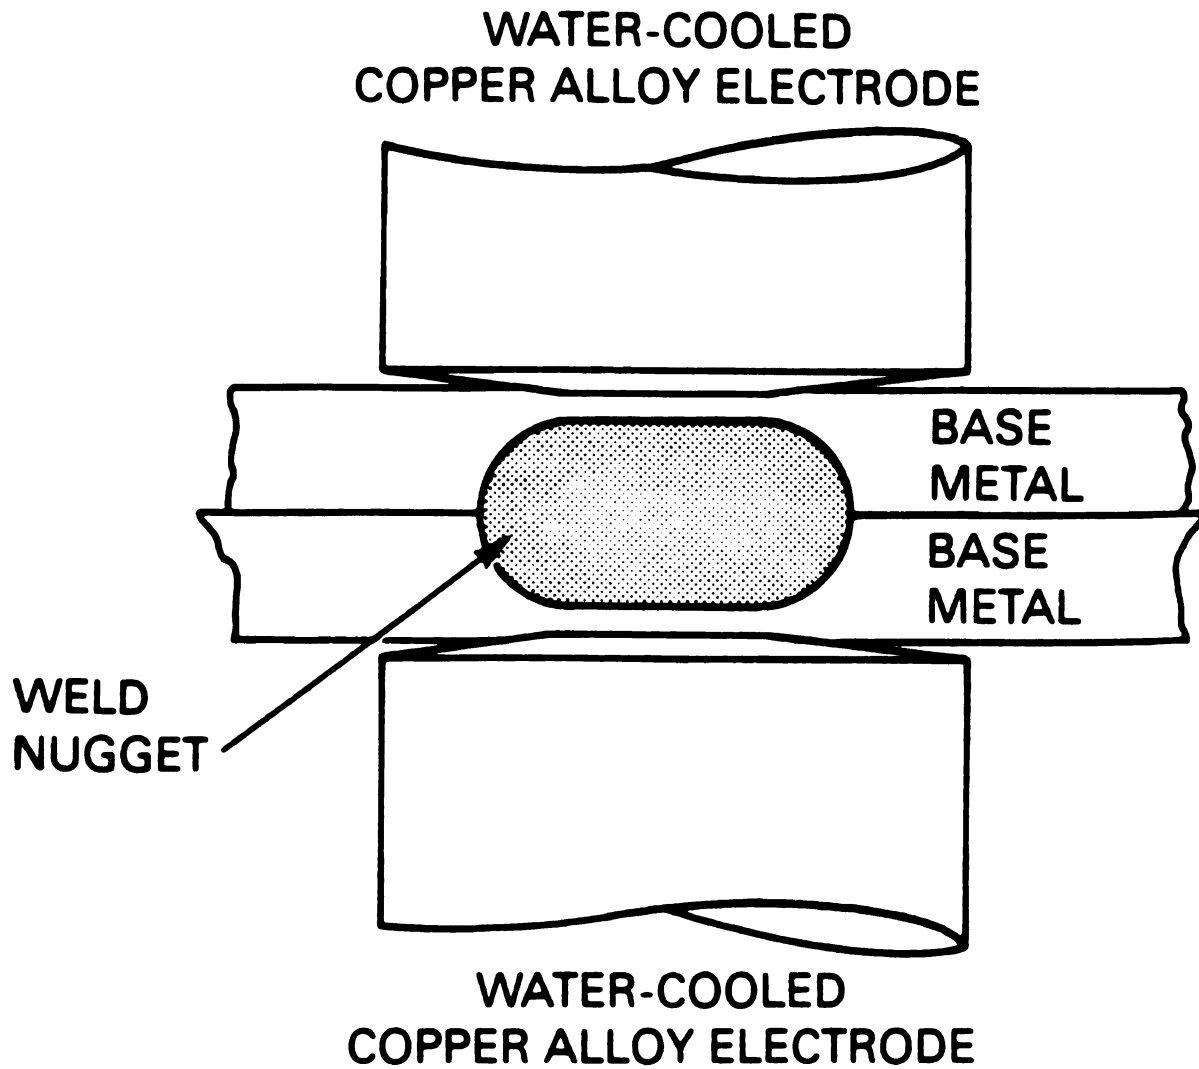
Schematic of resistance spot welding (Ref 62).
